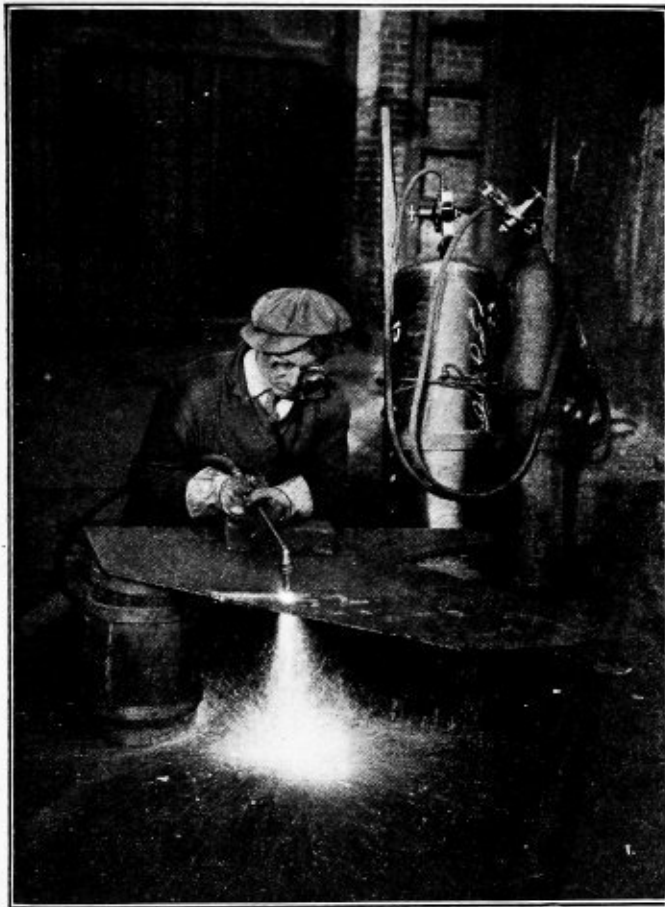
Cutting Boiler Plates. A Very Fine Cut can be Made by this Method
